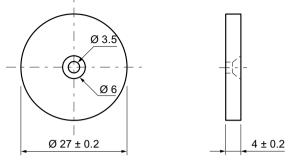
Dimensional drawing of MDS D524 All dimensions in mm
